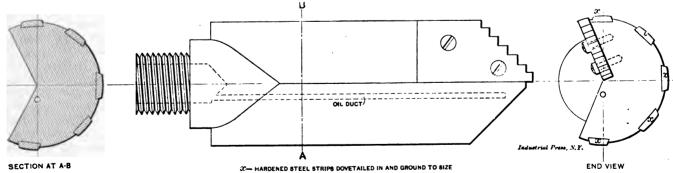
D-drill with Inserted Blade, used for Deep Drilling.
